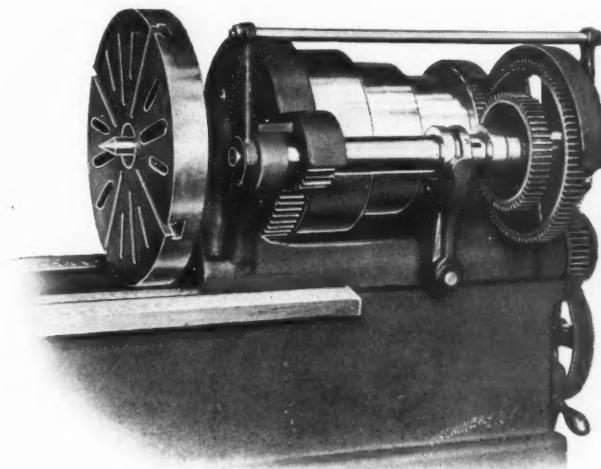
Rear View of Head-stock, showing Arrangement of Double Gearing
